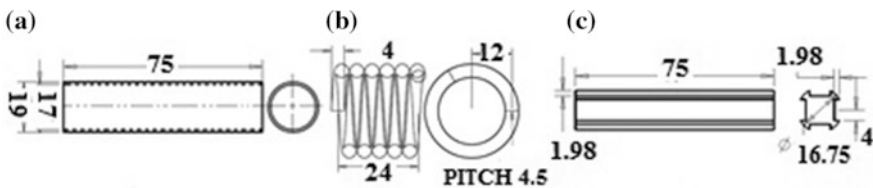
Geometrical dimension of a tube b coil, and c rod (dimensions are all in mm)
